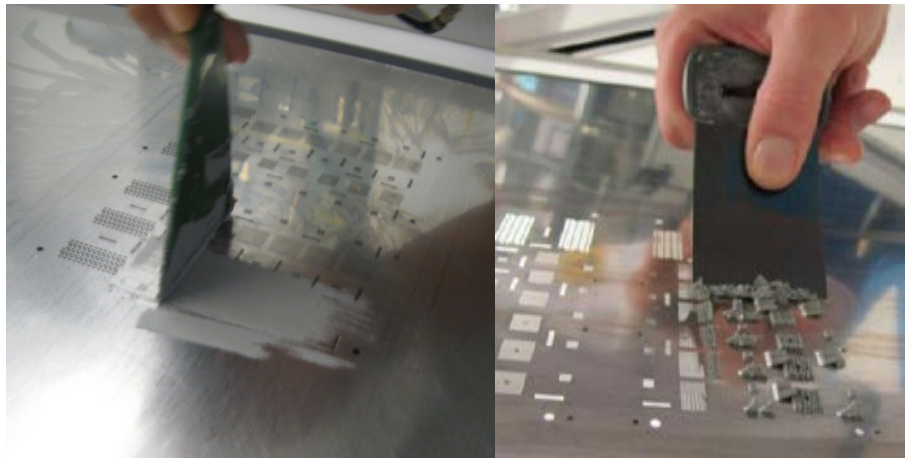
Filling of small apertures prior to vacuum cleaning test.
